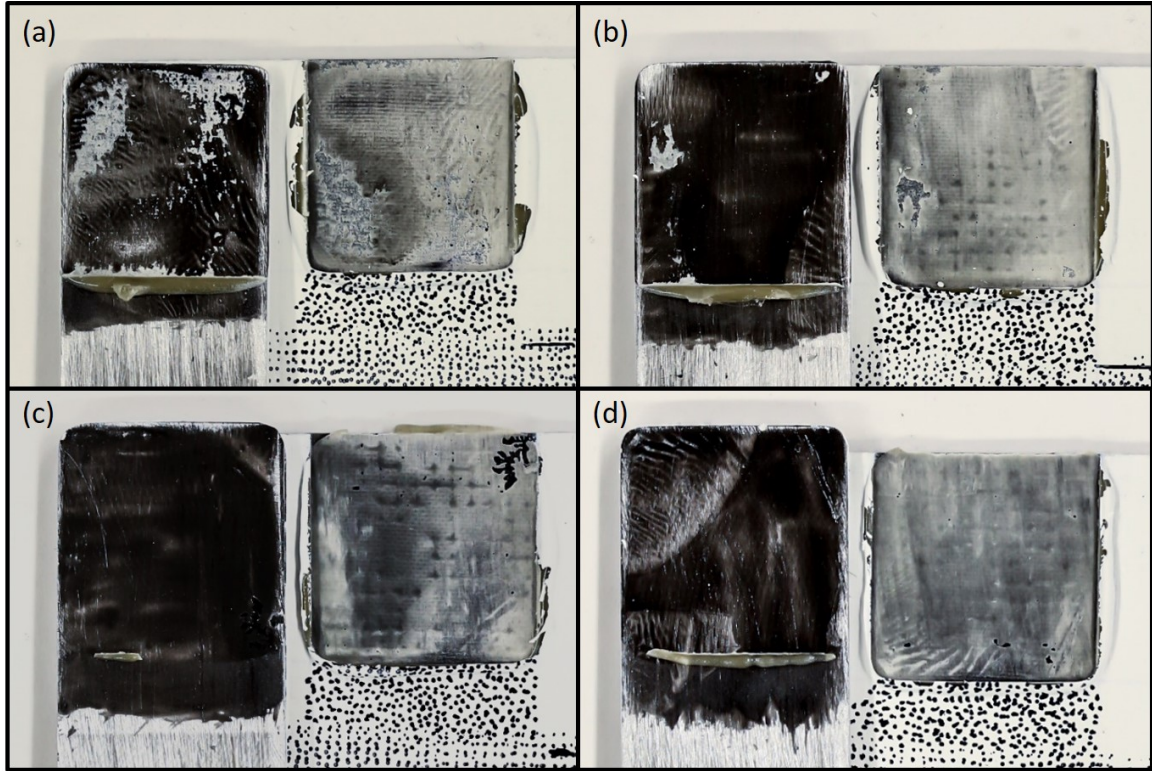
Adhesive tensile joint failure classification. (a) Specimen 1: mix of adhesive and cohesive failure. (b) Specimen 2: Adhesive failure with a small amount of cohesive failure. (c) Specimen 3: adhesive failure. (d) Specimen 4: adhesive failure.
